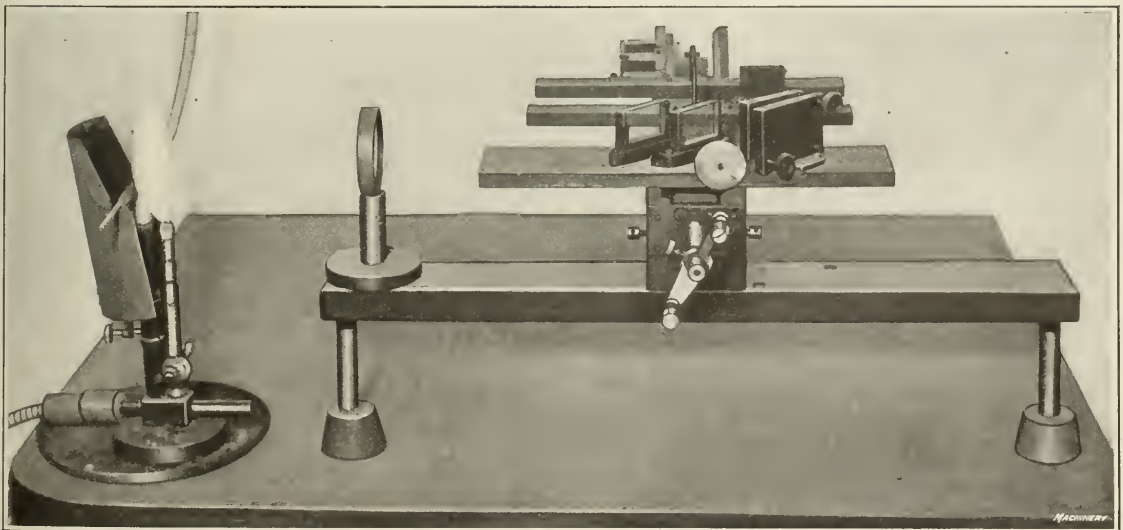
Front View of Interferometer shown in Fig. 11. This shows Ways on Bed and Bearings which support Screw to be tested
